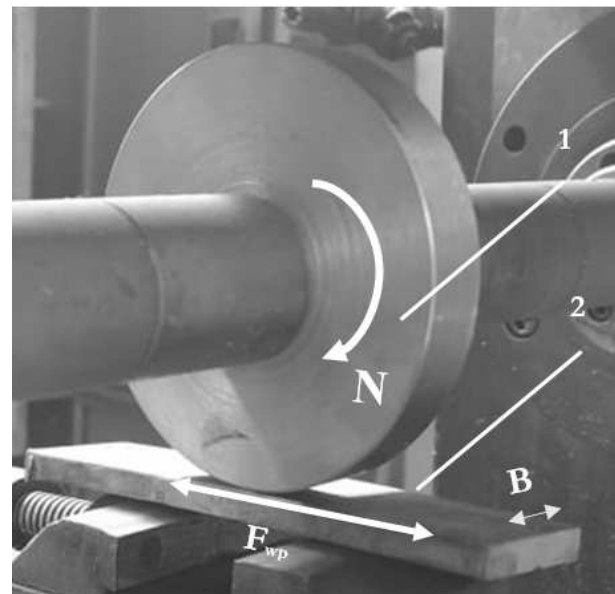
The hardening disc with the workpiece; 1. hardening disc, 2. workpiece
